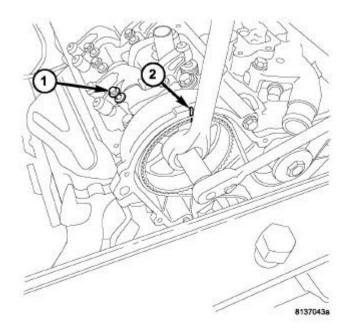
Cam Thrust Plate, Gasket & Bolts Courtesy of CHRYSLER LLC
